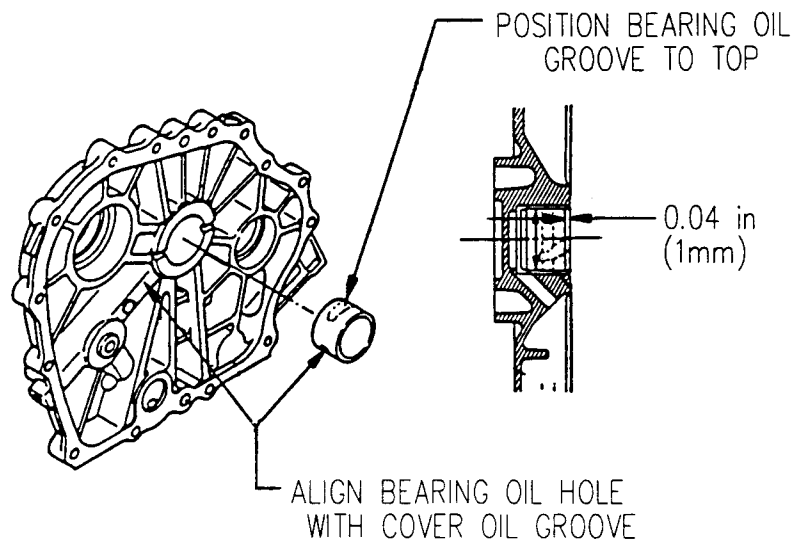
Positioning Crankshaft Bearing in Crankcase Cover.
